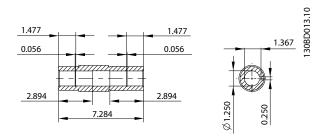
Stainless Steel 1 1/4 inch shaft
